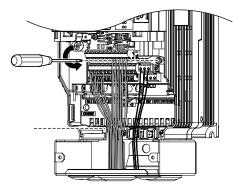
Unscrew the Terminal Board and Remove the Bottom Cover
